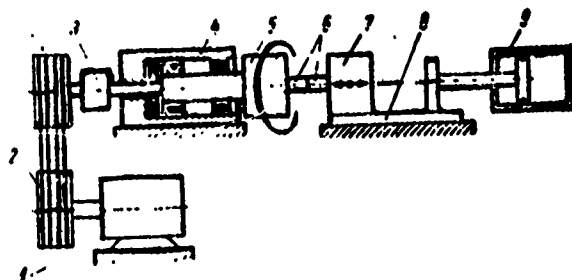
Principal structural-kinematic diagram of contemporary friction welding machine.
